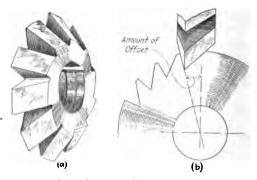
(a) Double angle cutter, left hand, for fluting cutters with saw-like teeth either straight or spiral. (b) Shows cutter off set to give radial face.
